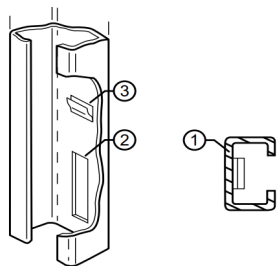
Notched Straight Rail Section (P/N 506270 GALV.)
